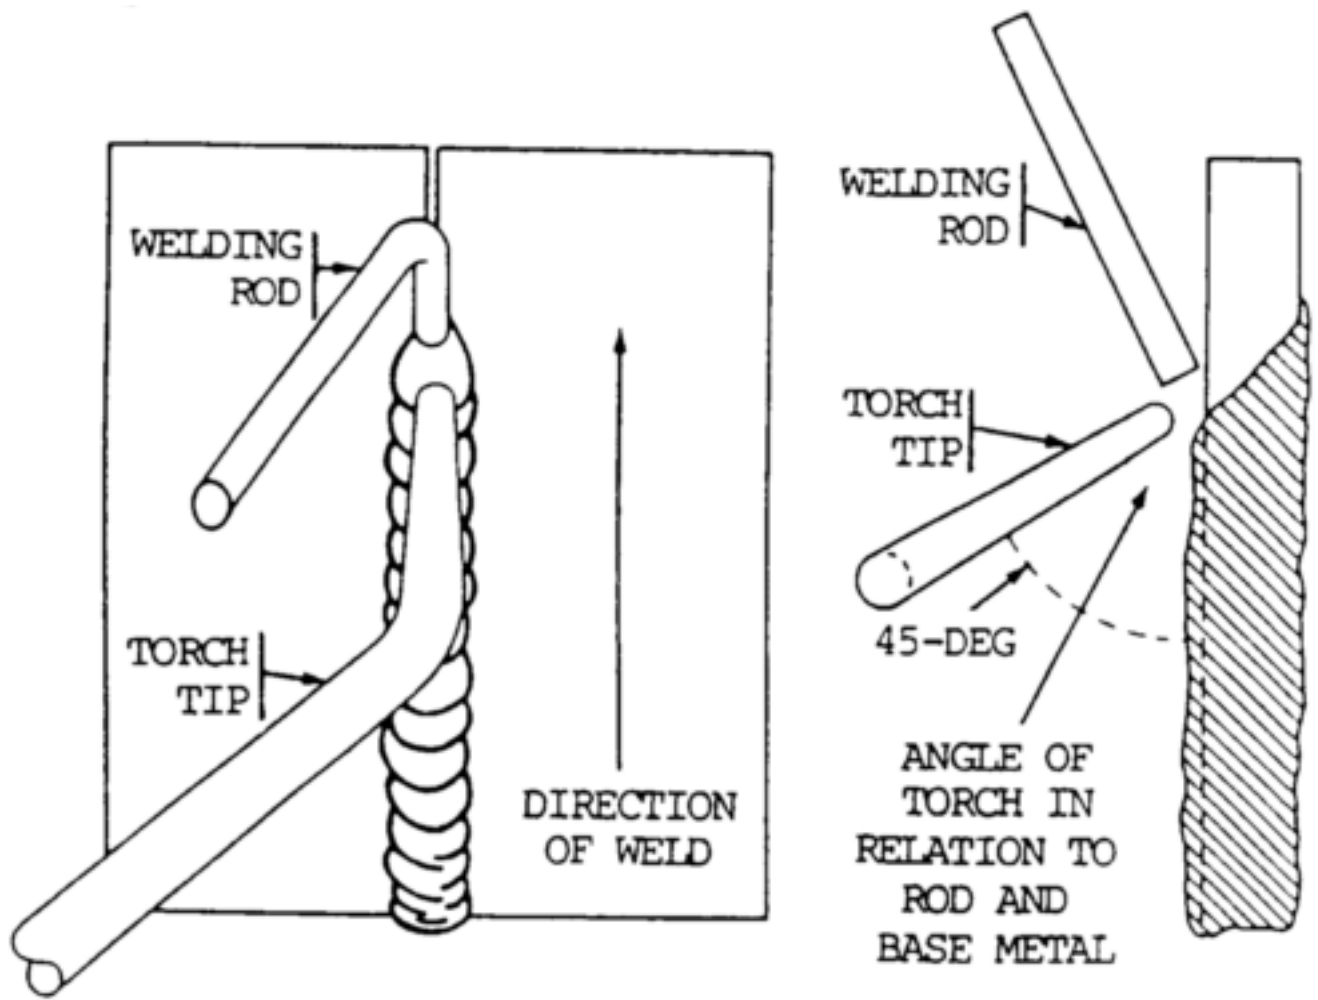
Welding a butt joint in the vertical position.
